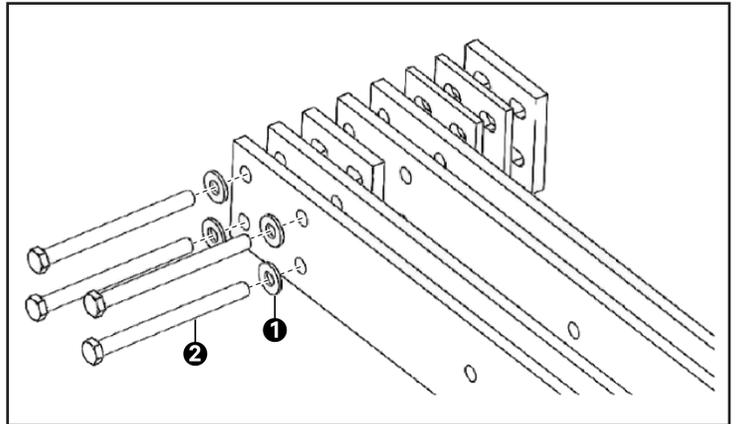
Exploded View of Busbar/Packer/Bolt Arrangement
